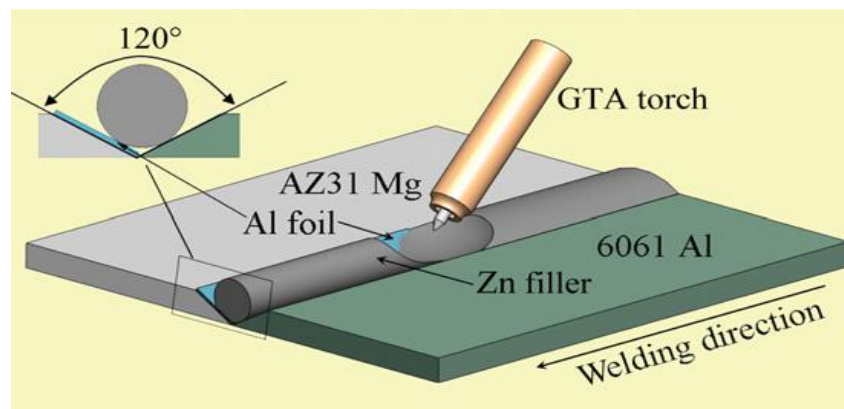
The schematic illustration of the GTA butt welding [Liu, 2013]
